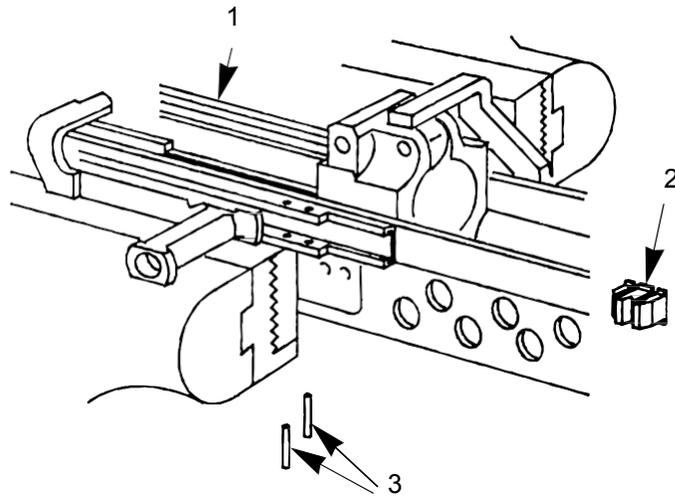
Removal of Spring Pins, Cocking Handle Stop.
